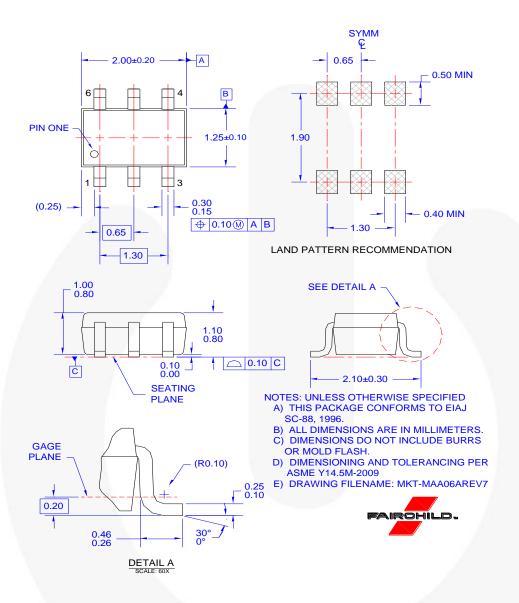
6-Lead, SC70, EIAJ SC88 1.25mm Wide Package
